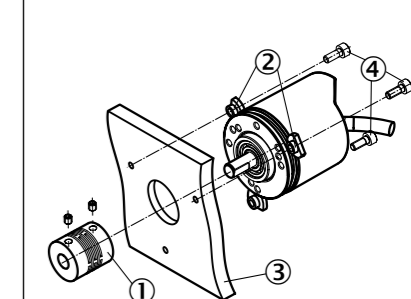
Installation DBS50 face mounting flange via threaded holes on the flange side
